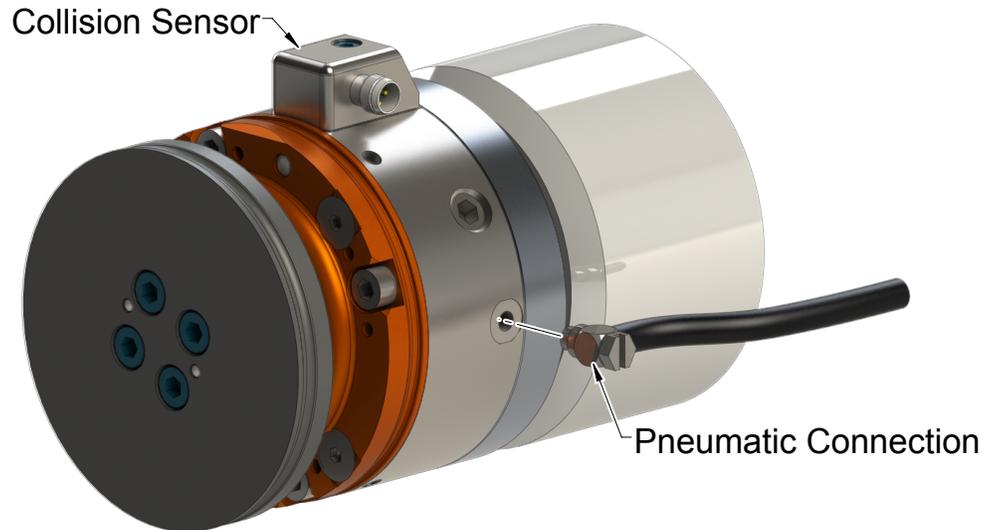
Install the Tooling Interface Plate to the Collision Sensor Stem
